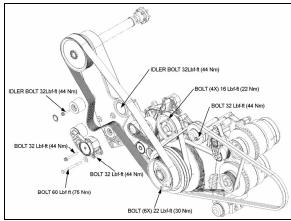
TIGHTENING SPECIFICATION (VOLVO D13 ENGINE)
